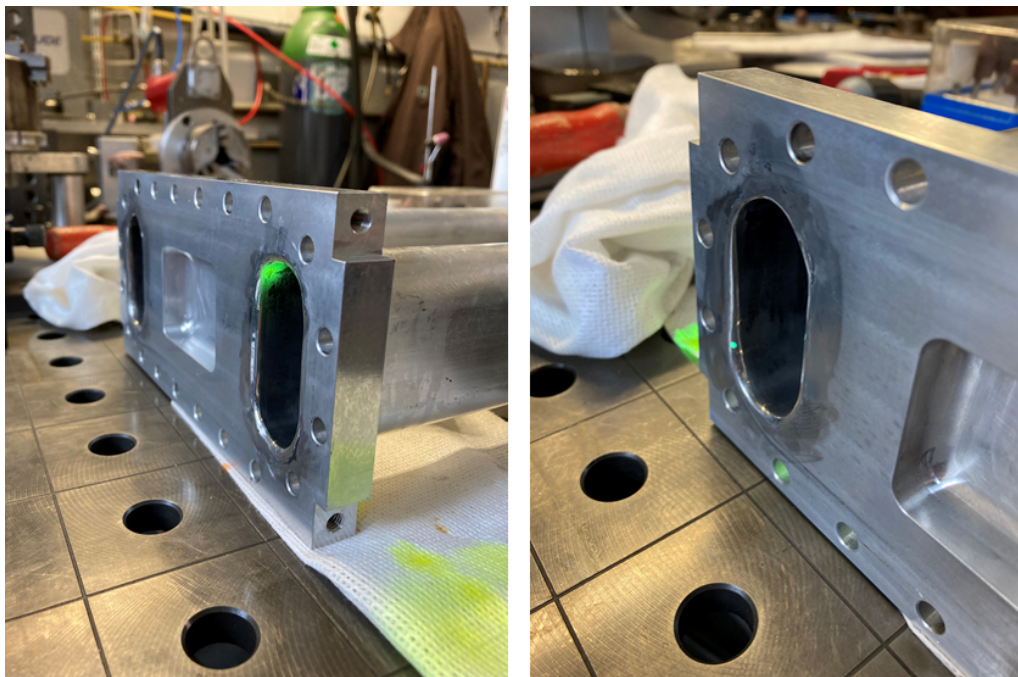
Dye penetration inspection of the welding seam between the oval tube and the attached aluminum plate.
